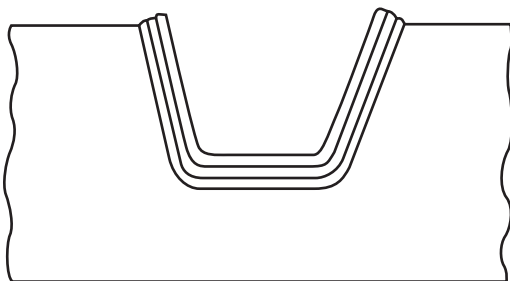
AUTOMATIC OR MACHINE (GTAW) TEMPER BEAD WELDING
